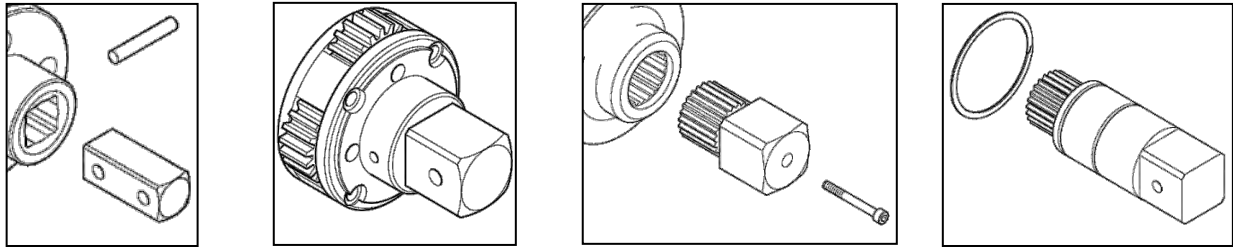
Drive square fixing (left to right): Pin, Carrier Assembly , Screw and circlip.
